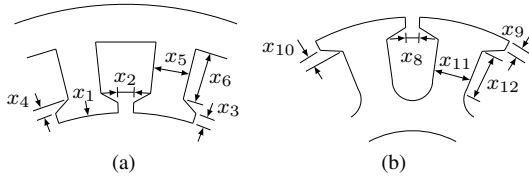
IM dimensional design variables of (a) stator and (b) rotor that are optimised.
